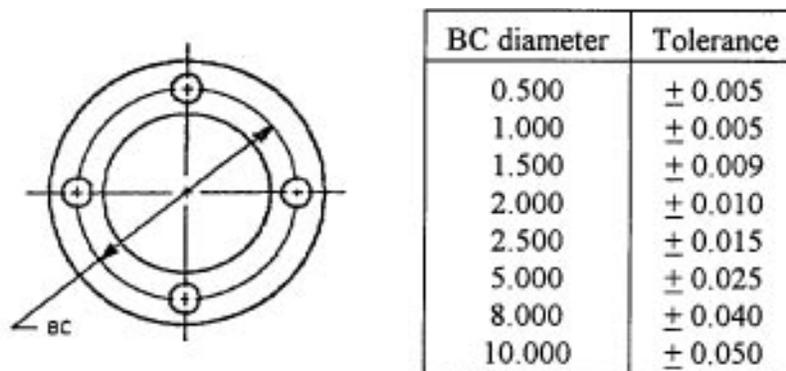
Hole positioning tolerances for investment castings.
